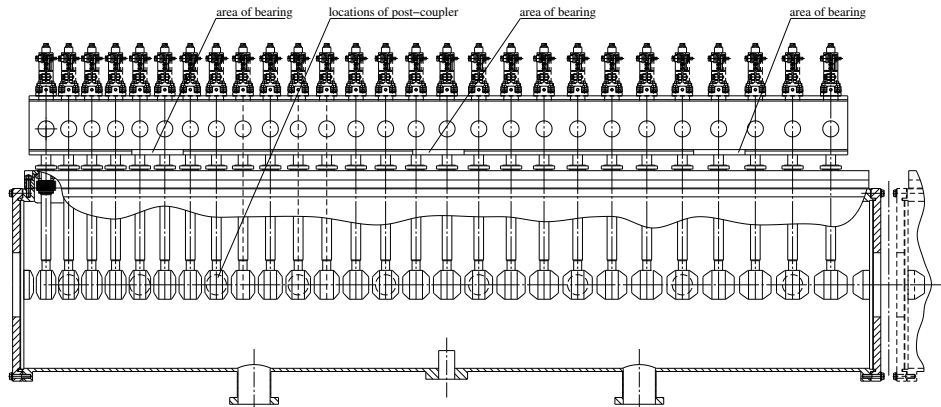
Side view of DTL tank manufactured by VNIIEF, Sarov
